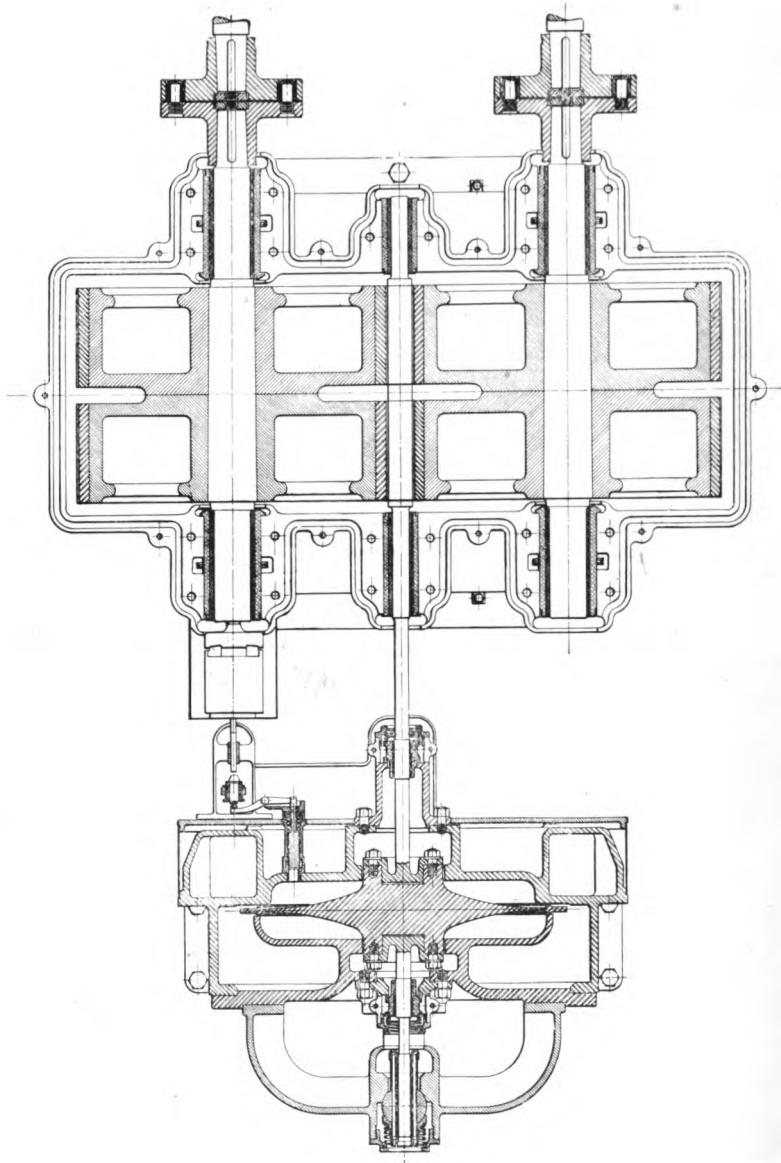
Sectional Plan De Laval Turbine, 300 H. P.
